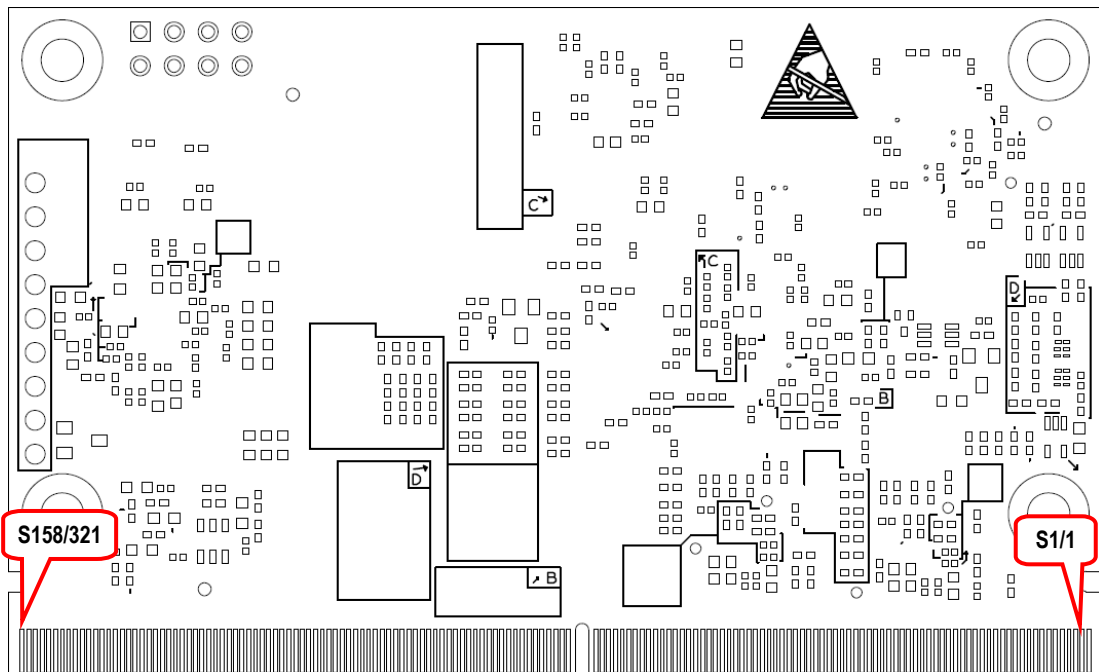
EACOM Board Pin Numbering, Bottom Side
